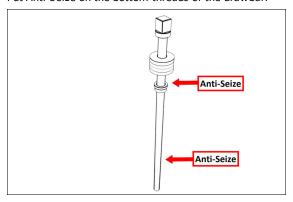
Locations to apply Anti-Seize on the drawbar assembly.
